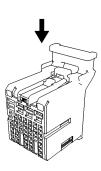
K9 Body Control Module X7 Connector End Views Courtesy of GENERAL MOTORS CORP.
